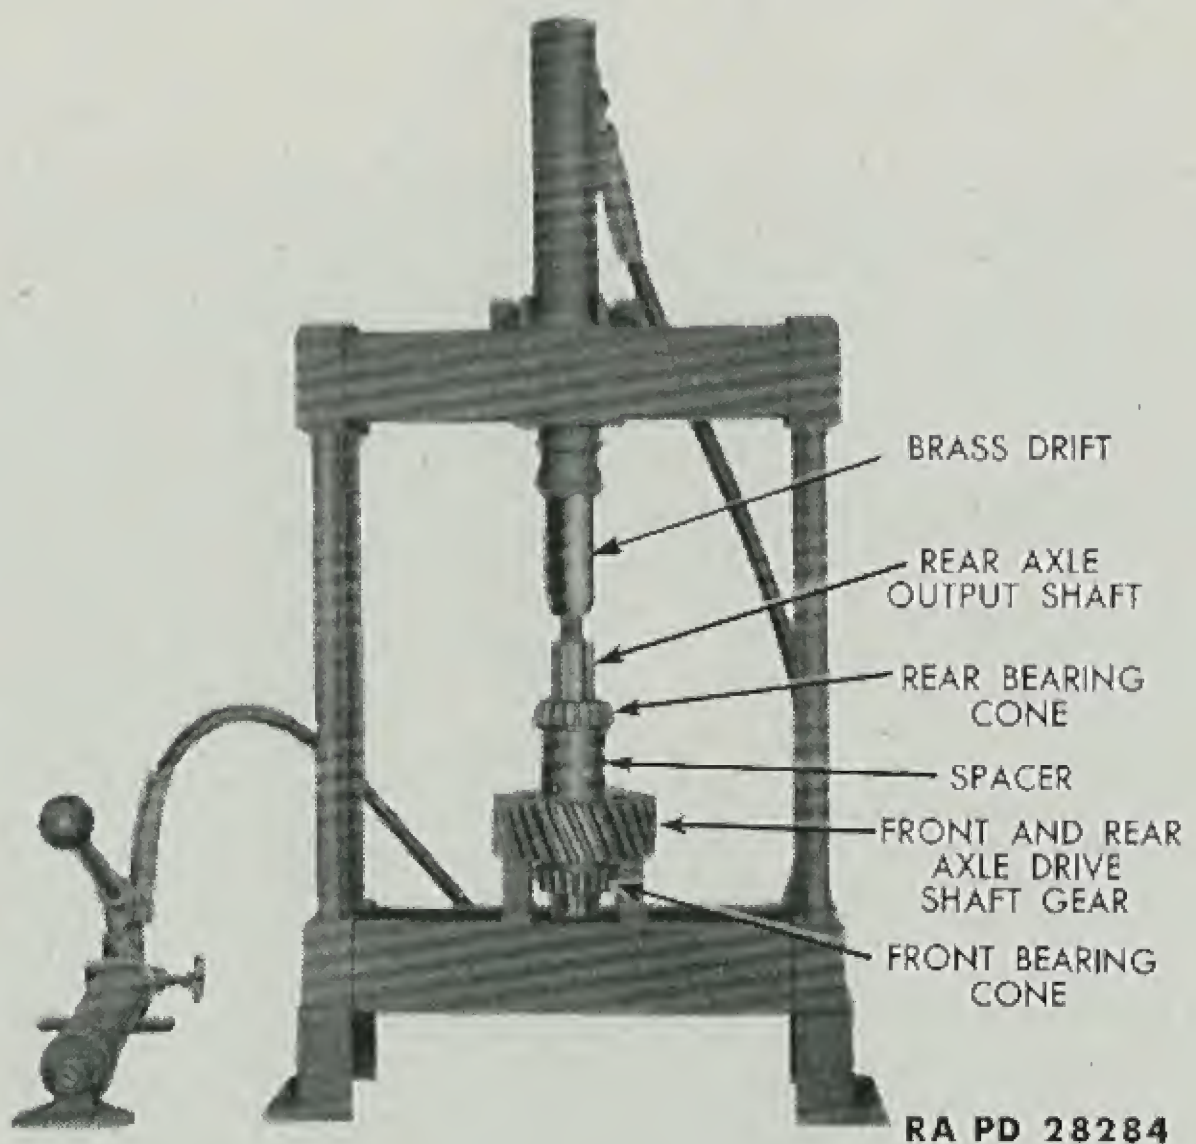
Pressing Bearing Cone, Spacer, and Gear off Rear Axle Output Shaft
